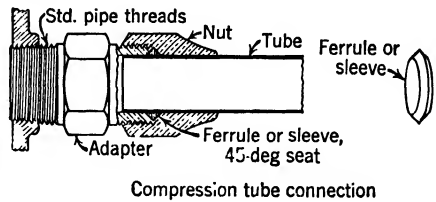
Tube connection with adapter and ferrule or sleeve.
